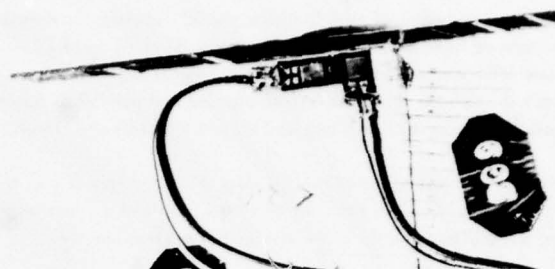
DT5 CRACK TIP - BACK VIEW
